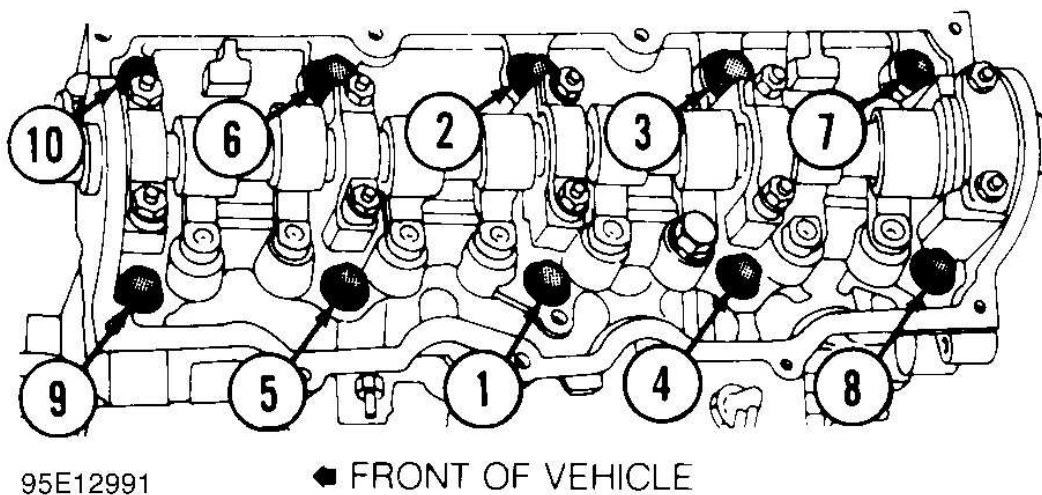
Typical Cylinder Head Tightening or Loosening Sequence
